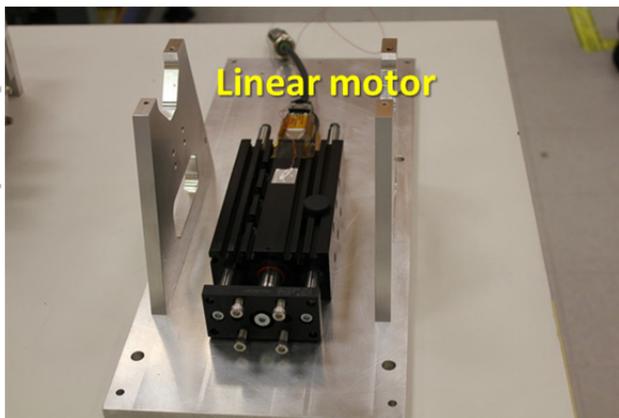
Linear motor slide assembly with magnetic shielding removed.
